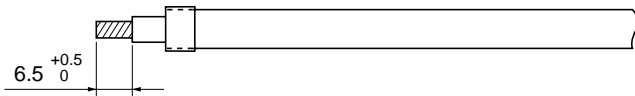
(3) Removal of Insulator from Coaxial Cable
